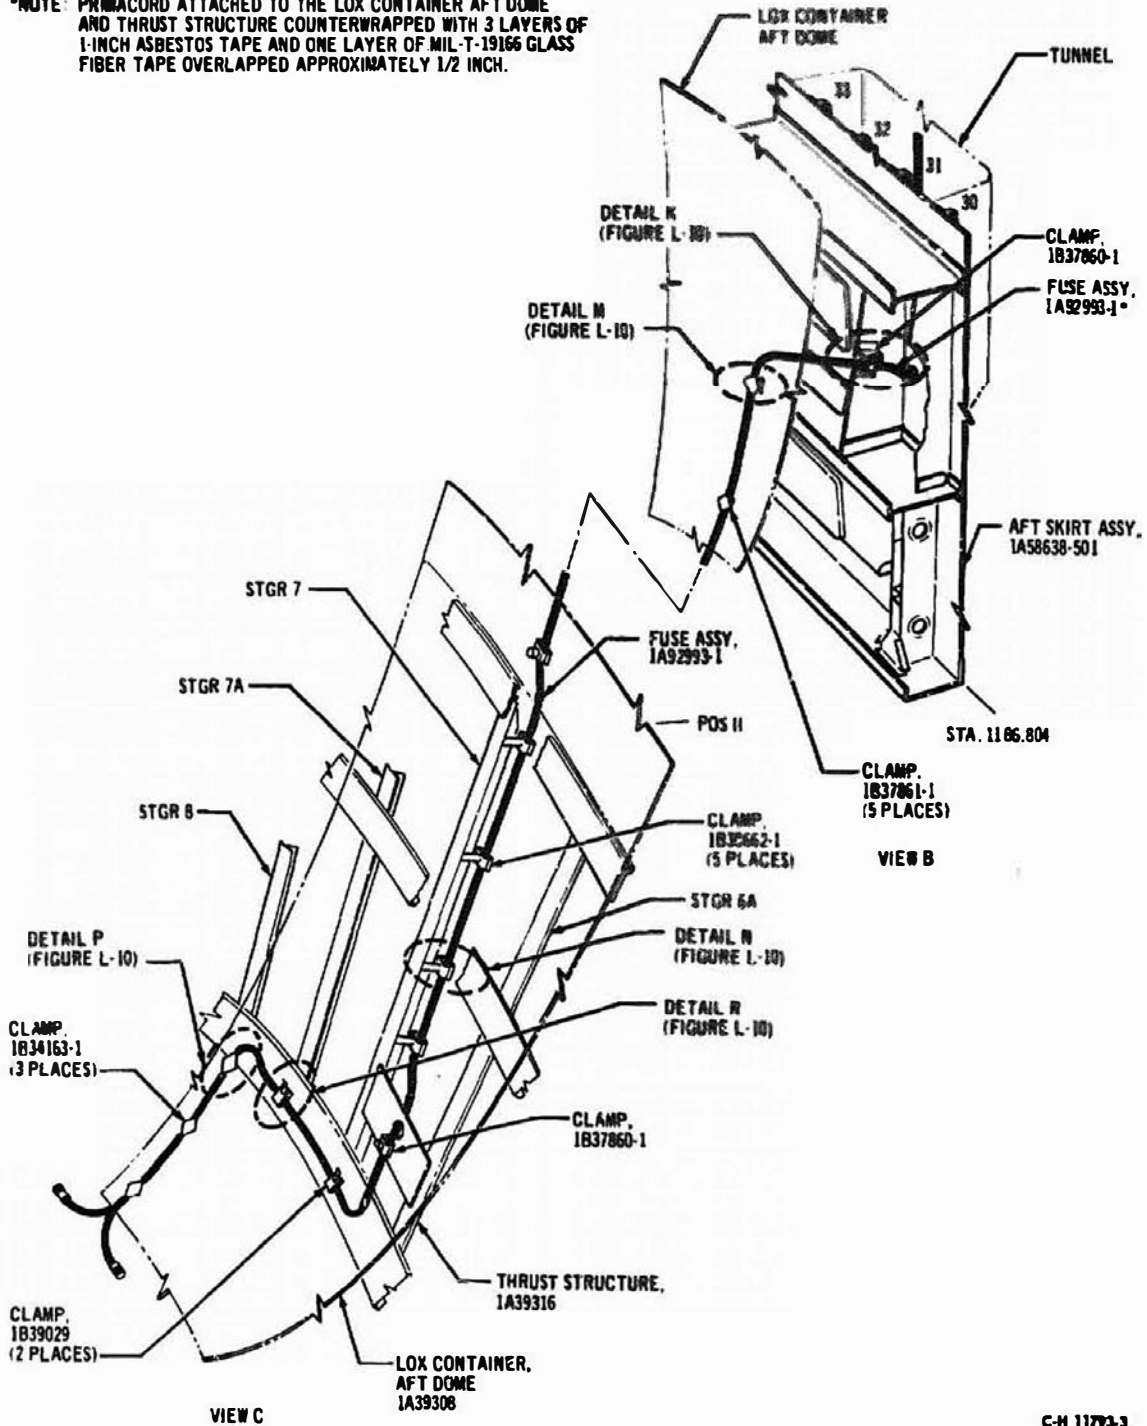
AFT DOME FUSE ASSEMBLY - INSTALLATION VIEW (Sheet 1 of 2)
